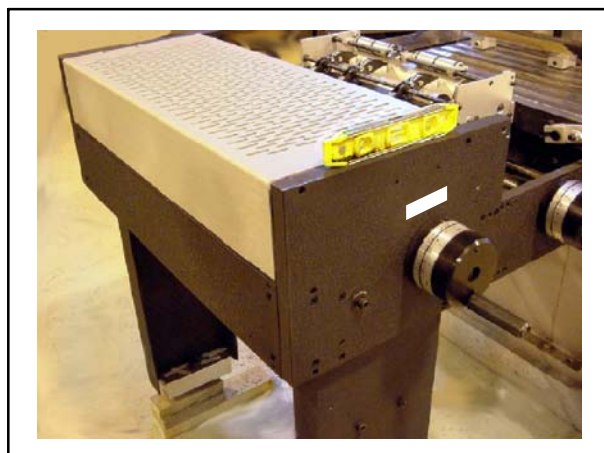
Level Tab Cutter Assembly Front to Back
